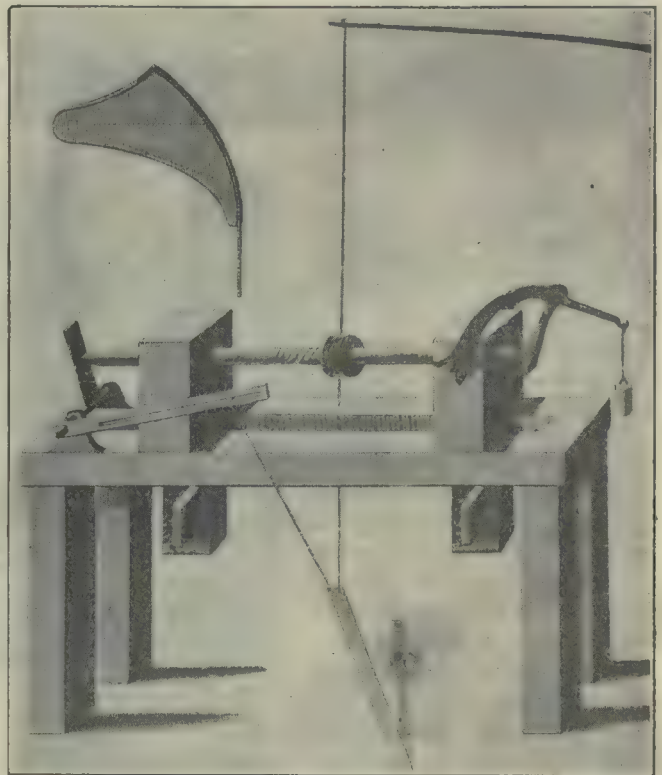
GRANDJEAN'S SCREW-CUTTING LATHE
